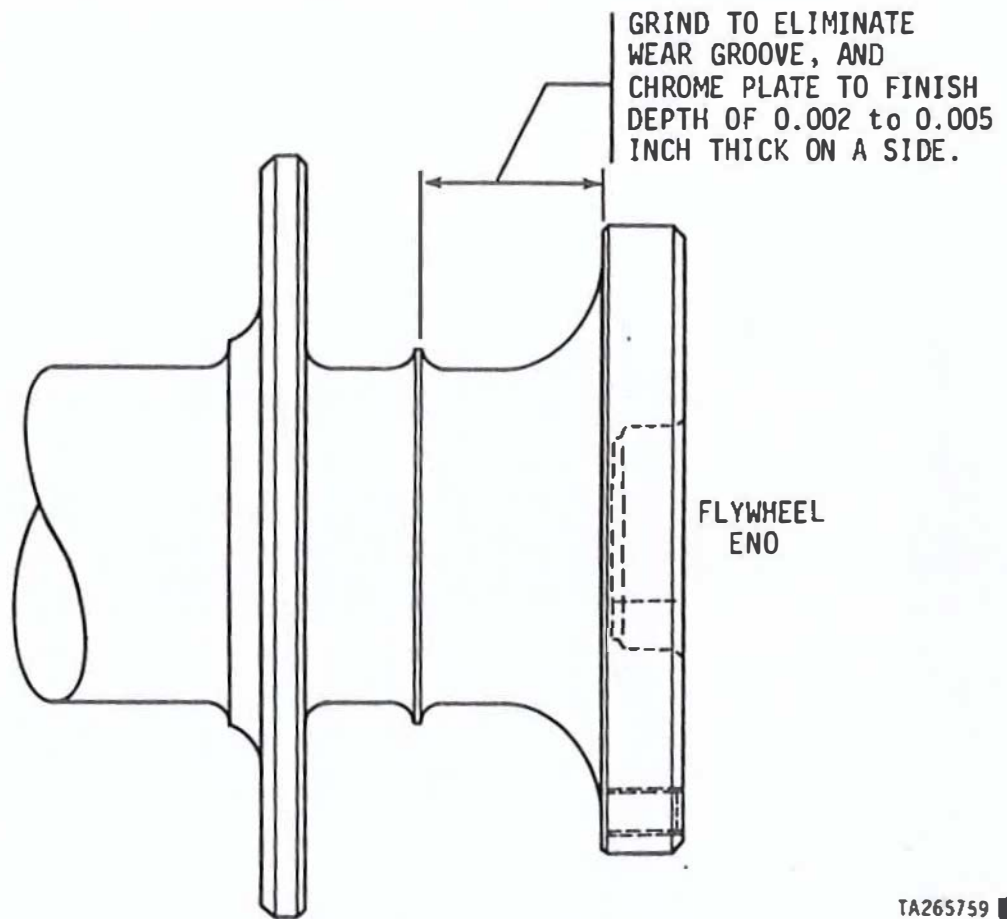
Crankshaft rear oil seal restoration area.
